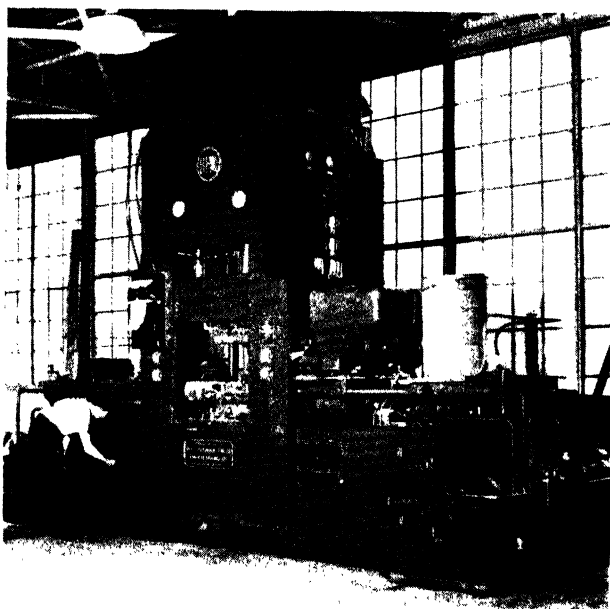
H.P.M. injection moulding machine with multiple inlets
